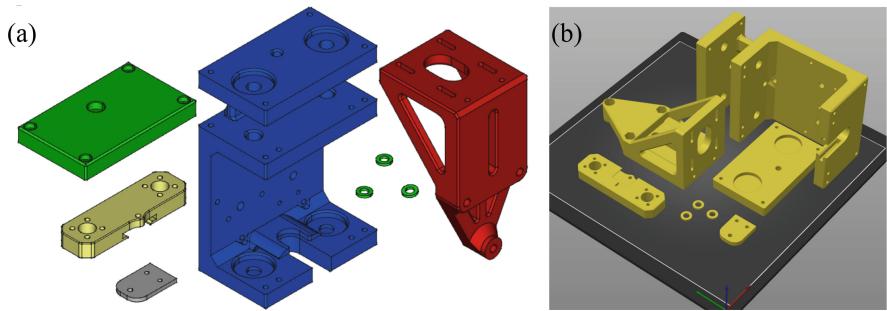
3D-designed parts for additive manufacturing for assembly of SVEEn. (a) Design files of parts. Top cover (green), syringe piston holder (yellow), x-axis end-stop (gray), main body (blue), stepper motor mount (red). (b) Recommended alignment on the print surface for FFF. (Color figure online)
